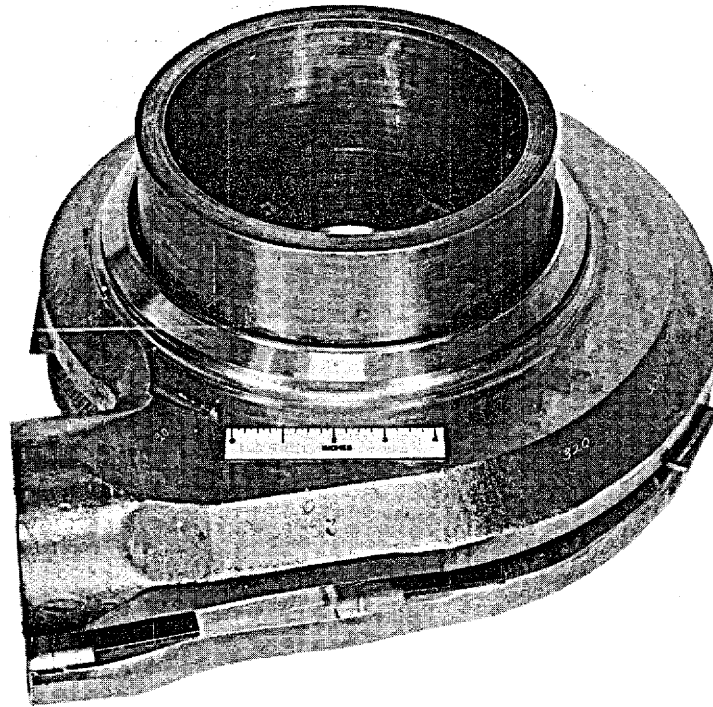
Volute No. 2 Assembled for Welding.
